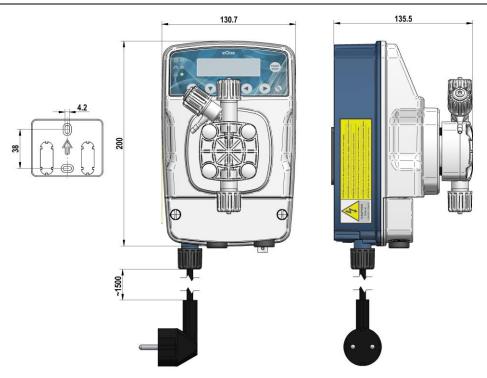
Pump and plate for wall mounting (dimensions in mm.).
